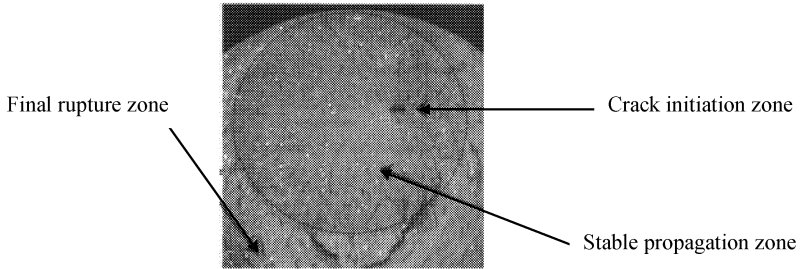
crack initiation zone of a CR dumbbell specimen [11]
